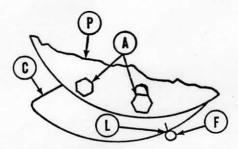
Schematic view of speed control mechanism, Johnson and Evinrude 1967 models have two marks as shown in Fig. OM6-5.
